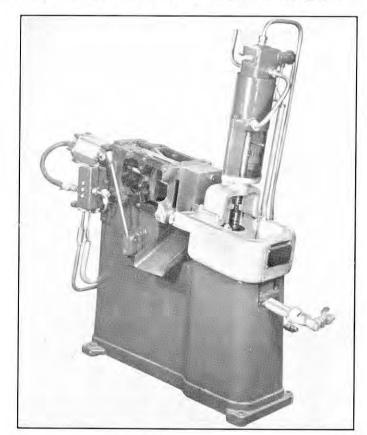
IMP-96 Die-Casting Machine; Alfred Herbert, Ltd.
